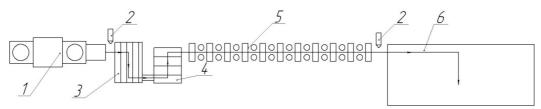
The accepted scheme of casting-rolling mill: 1 – CCM; 2 – scissors; 3 – drag-over unit; 4 – heating furnace; 5 – mill; 6 – fridge for finished product
